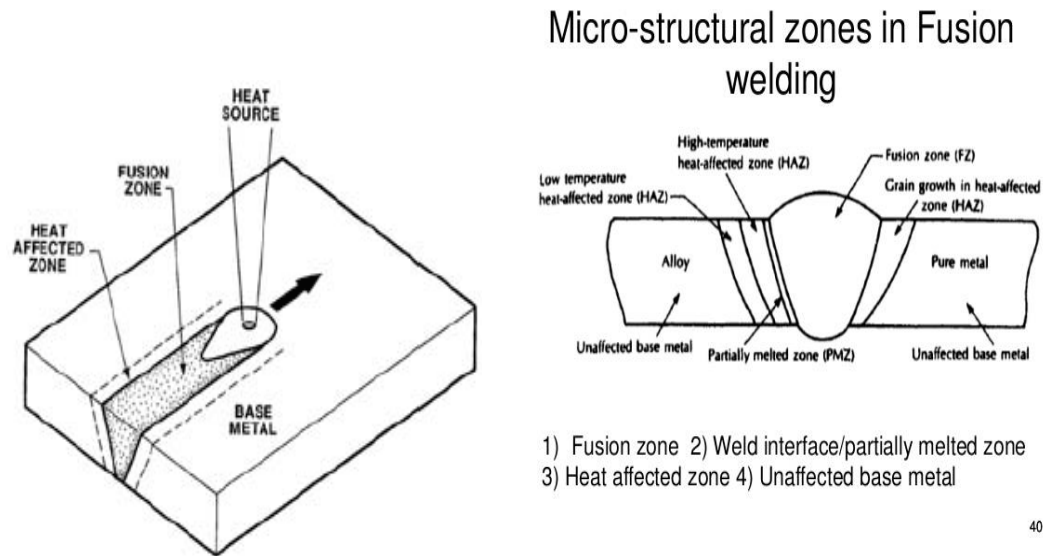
Different Welded Zones of Carbon Steel (Parma, 2010)
